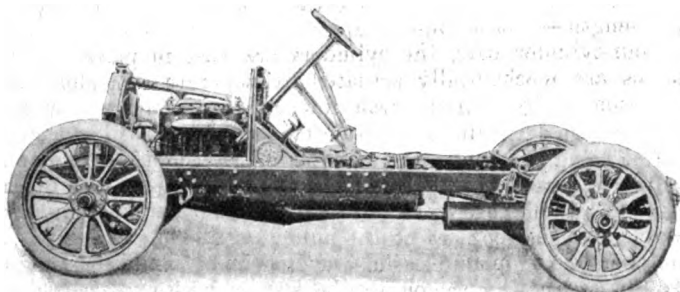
Chassis of Westinghouse 20-30-h.p. Live Axle Car.
